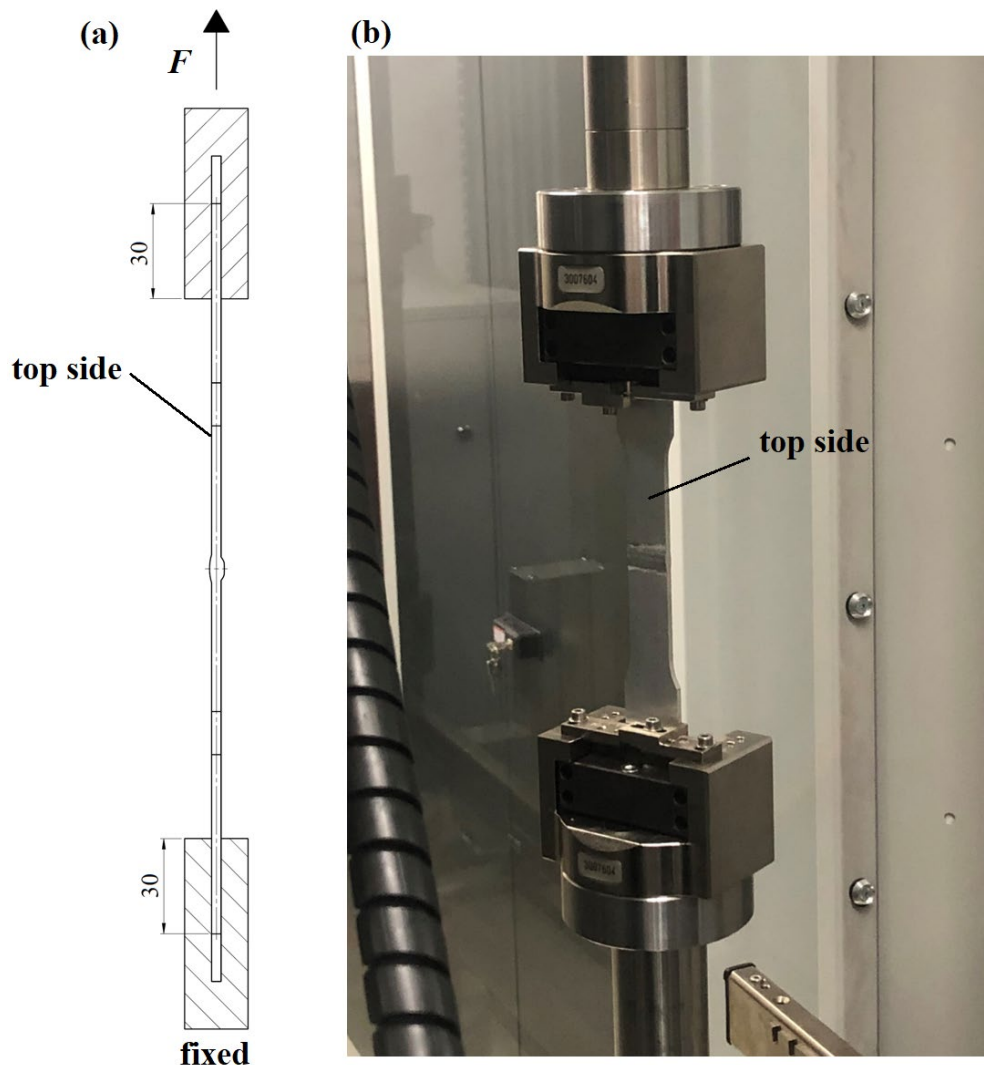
Butt joint specimen HCF tension: (a) testing setup, (b) specimen in the device
